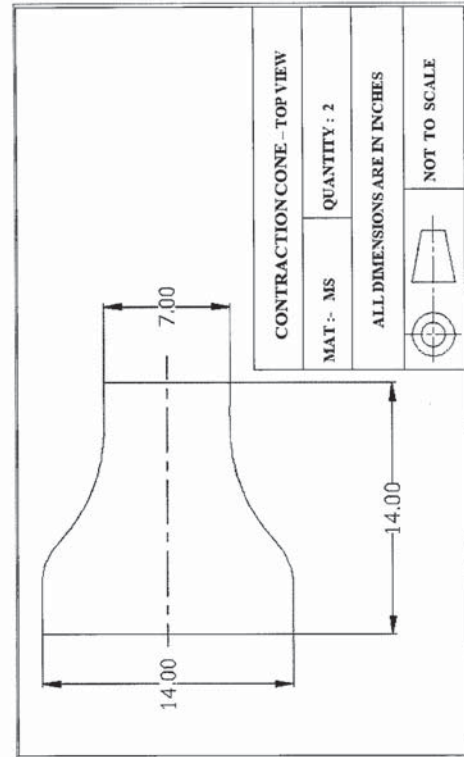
CAD DRAWING OF CONTRACTION CONE – TOP VIEW
